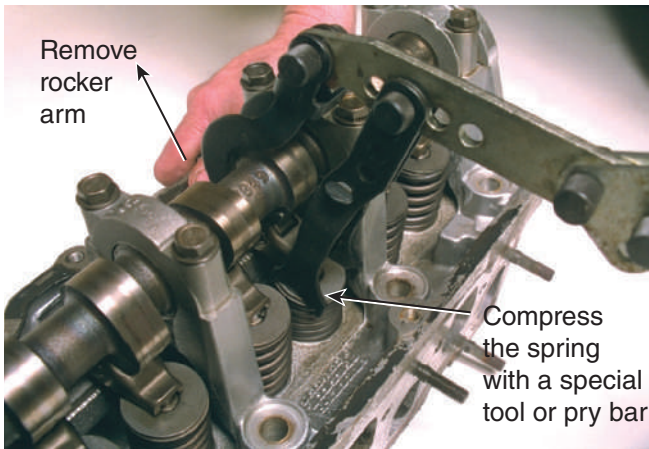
On some OHC heads, the valve springs must be slightly compressed to remove the rocker arms.
